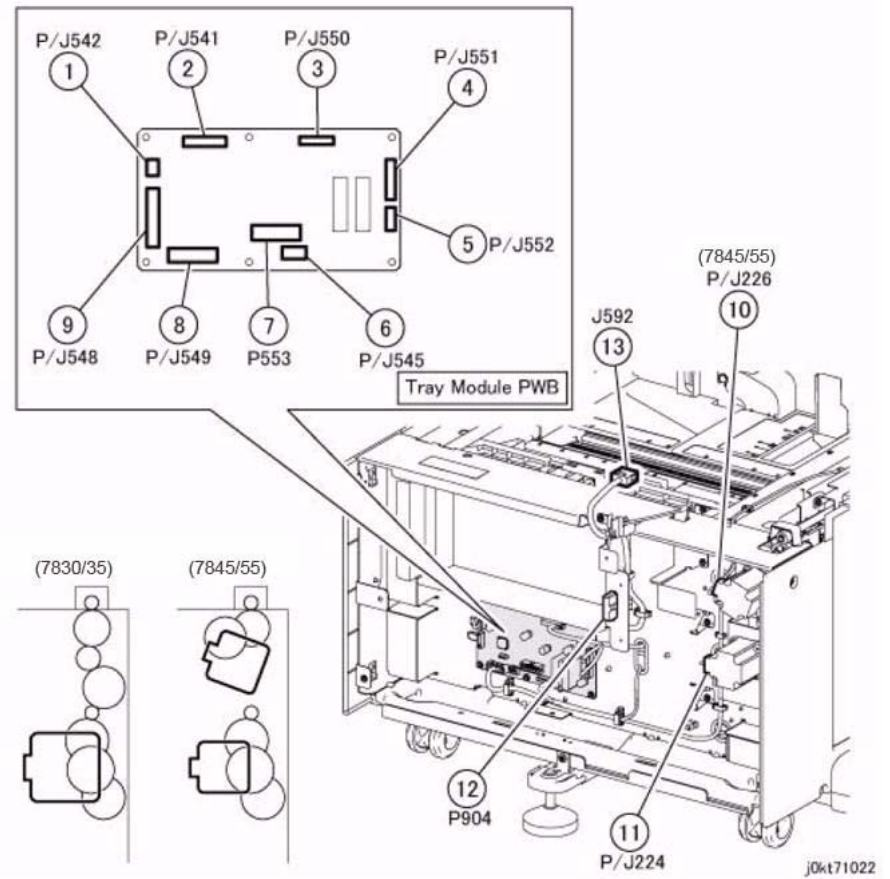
3T Module - Tray Module PWB, TM Take Away Motor
